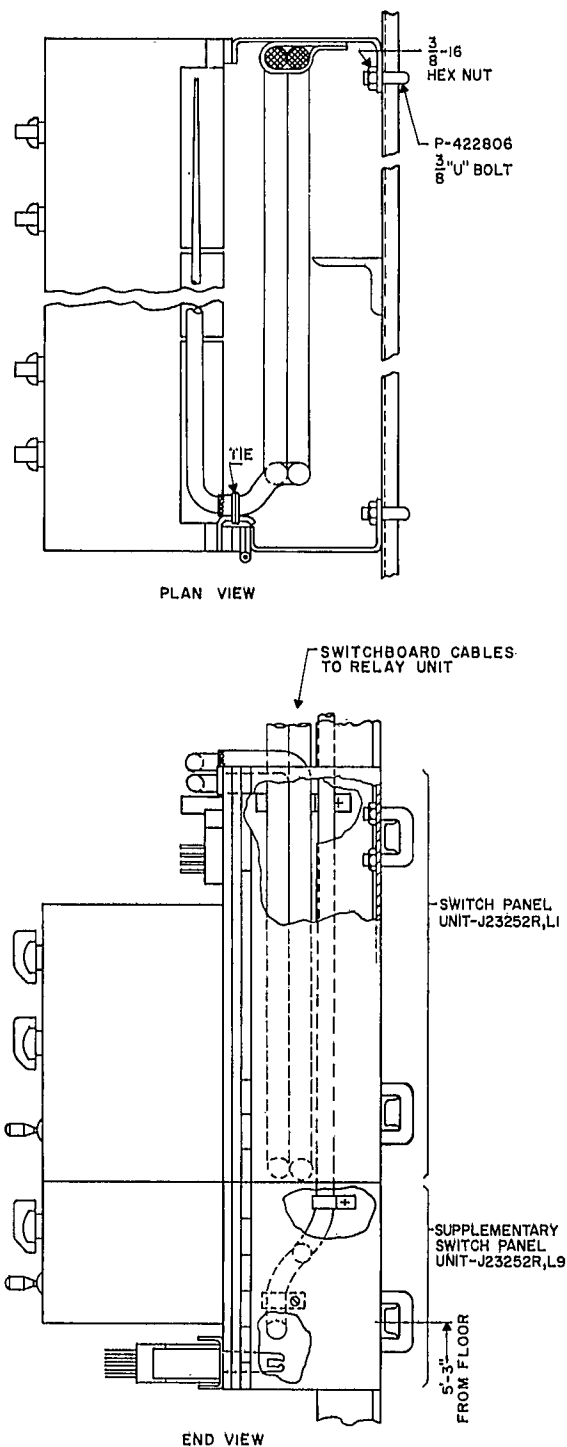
Switch Panel Unit Mounted on Distributing Frame (A&M Only)
